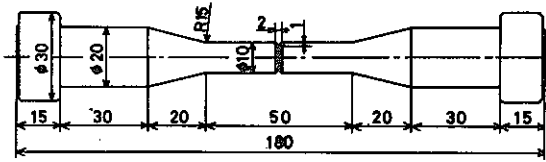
Fatigue test specimen. Dimensions in millimeters.
